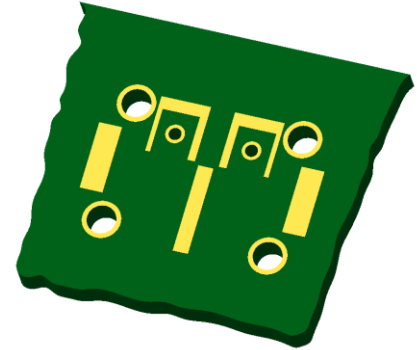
PCB Layout for MATE-AX header 2306368
